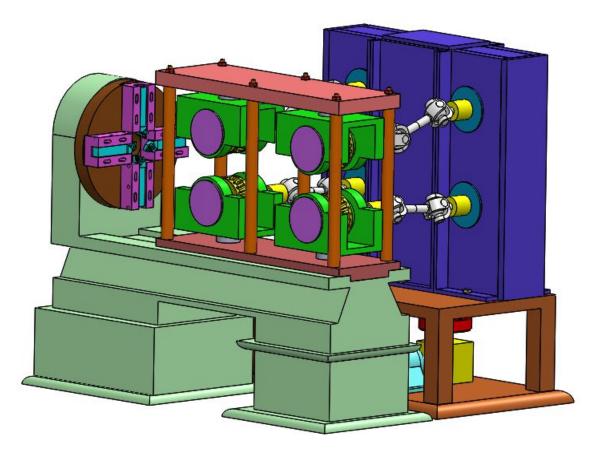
Layout of Bar Peeling Attachments on Lathe Machine
